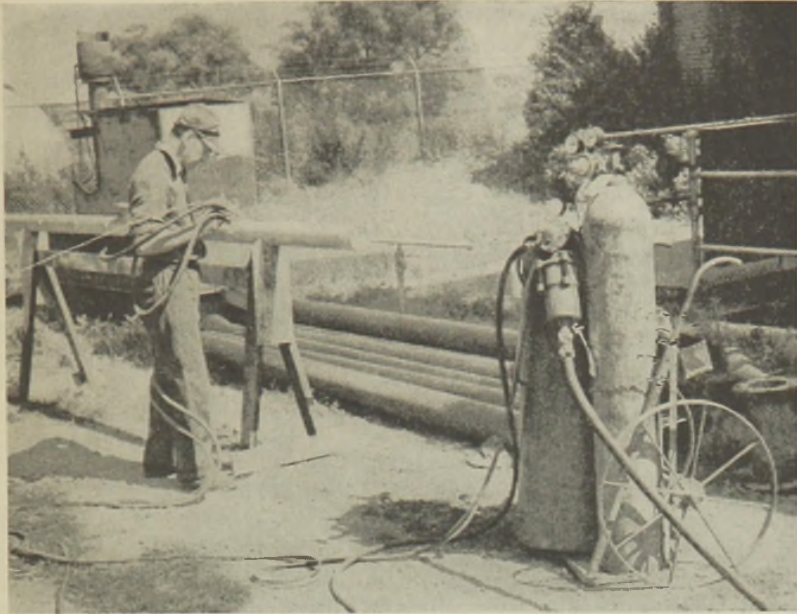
Application of zinc protective coating to metal equipment parts at Fort Dodge, Ia.
